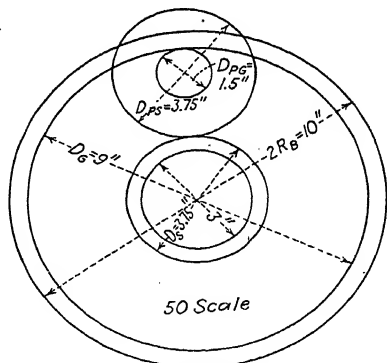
Layout for the radial-engine cam-ring drive, Par. 10-10.
